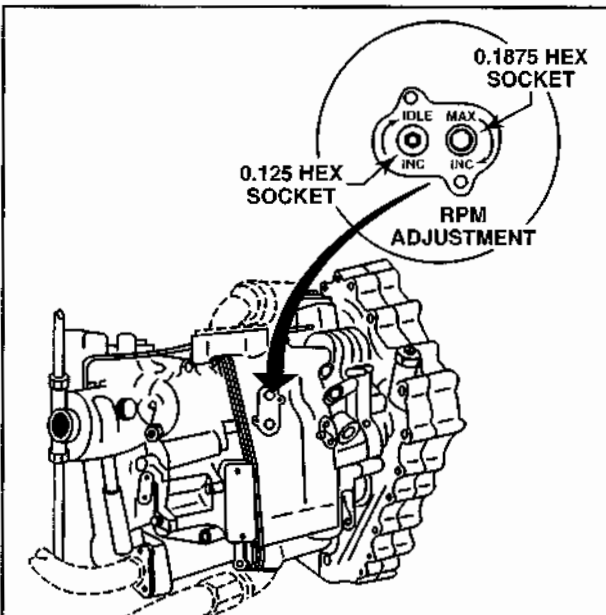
A typical turbine engine fuel control unit is equipped with adjustment screws for trimming the engine. Trimming procedures enable you to adjust both idle speed and maximum rated thrust.
